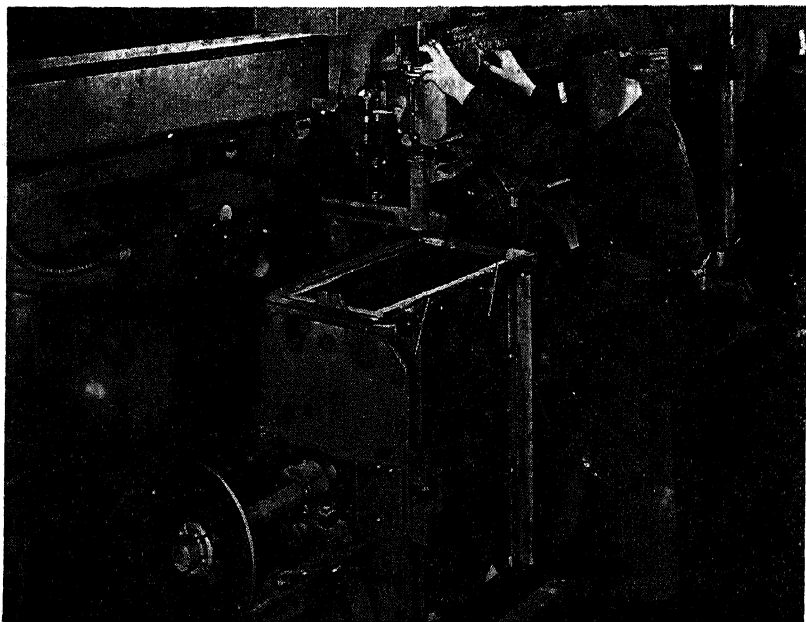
Fabricating main body of hammer mill by automatic carbon arc process.
